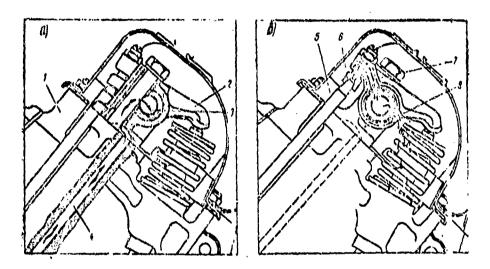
Schematic of rocker arm mechanism lubrication:
